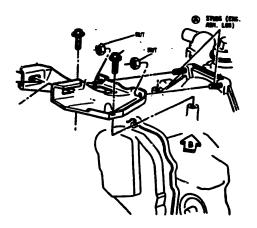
Transaxle and Transaxle Mount Bracket Assembly Drawing
